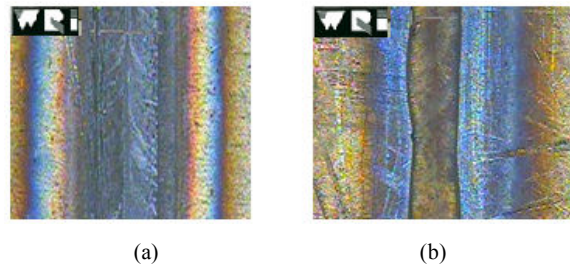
Smooth finish of Butt weld bead surfaces (a) Top side and (b) Root side
